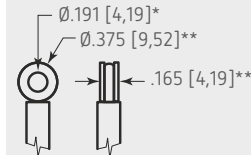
Outline Drawing (36 oz. cable tension only)
